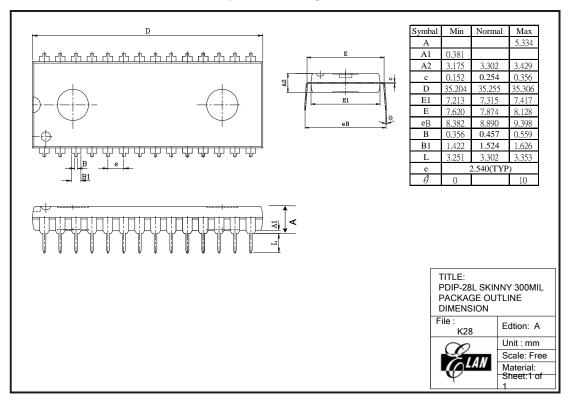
EM78F644/544N 28-pin Skinny DIP Package Type
